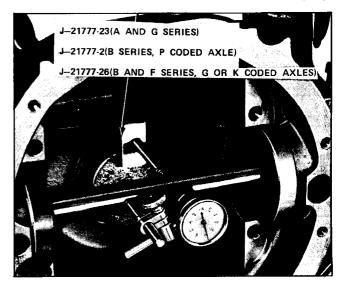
C-15 Pinion Setting Gage Assembly Installed
